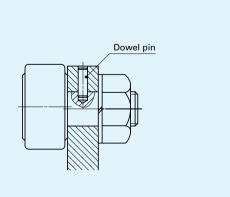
Mounting example of Solid Eccentric Stud Type Cam Follower
